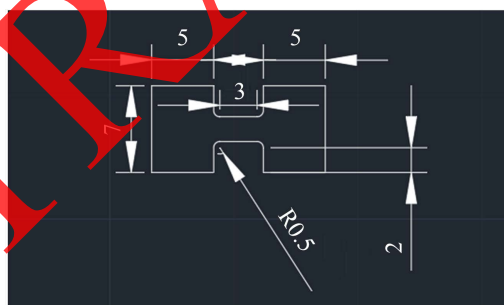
Dimension drawing of Pb-Sn alloy tensile sample (unit: mm)
